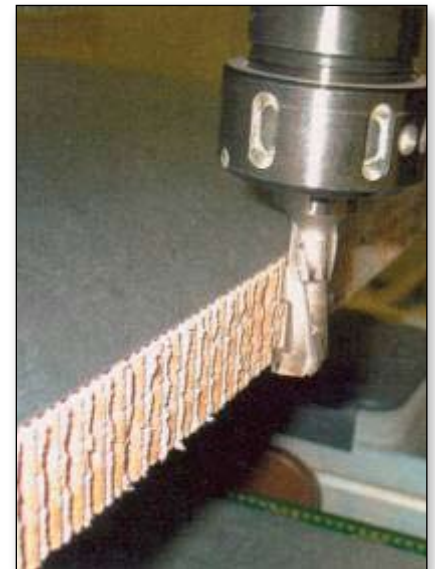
Cutting a lightweight panel based on an expanded paper honeycomb core.
